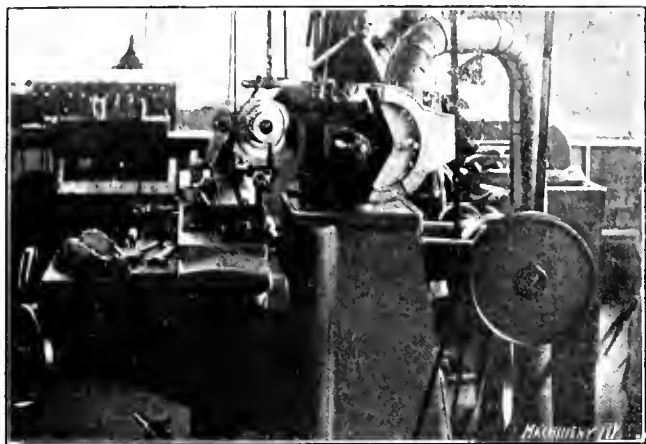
Dusthood and Exhaust Pipe on a Swivel-head Grinder
